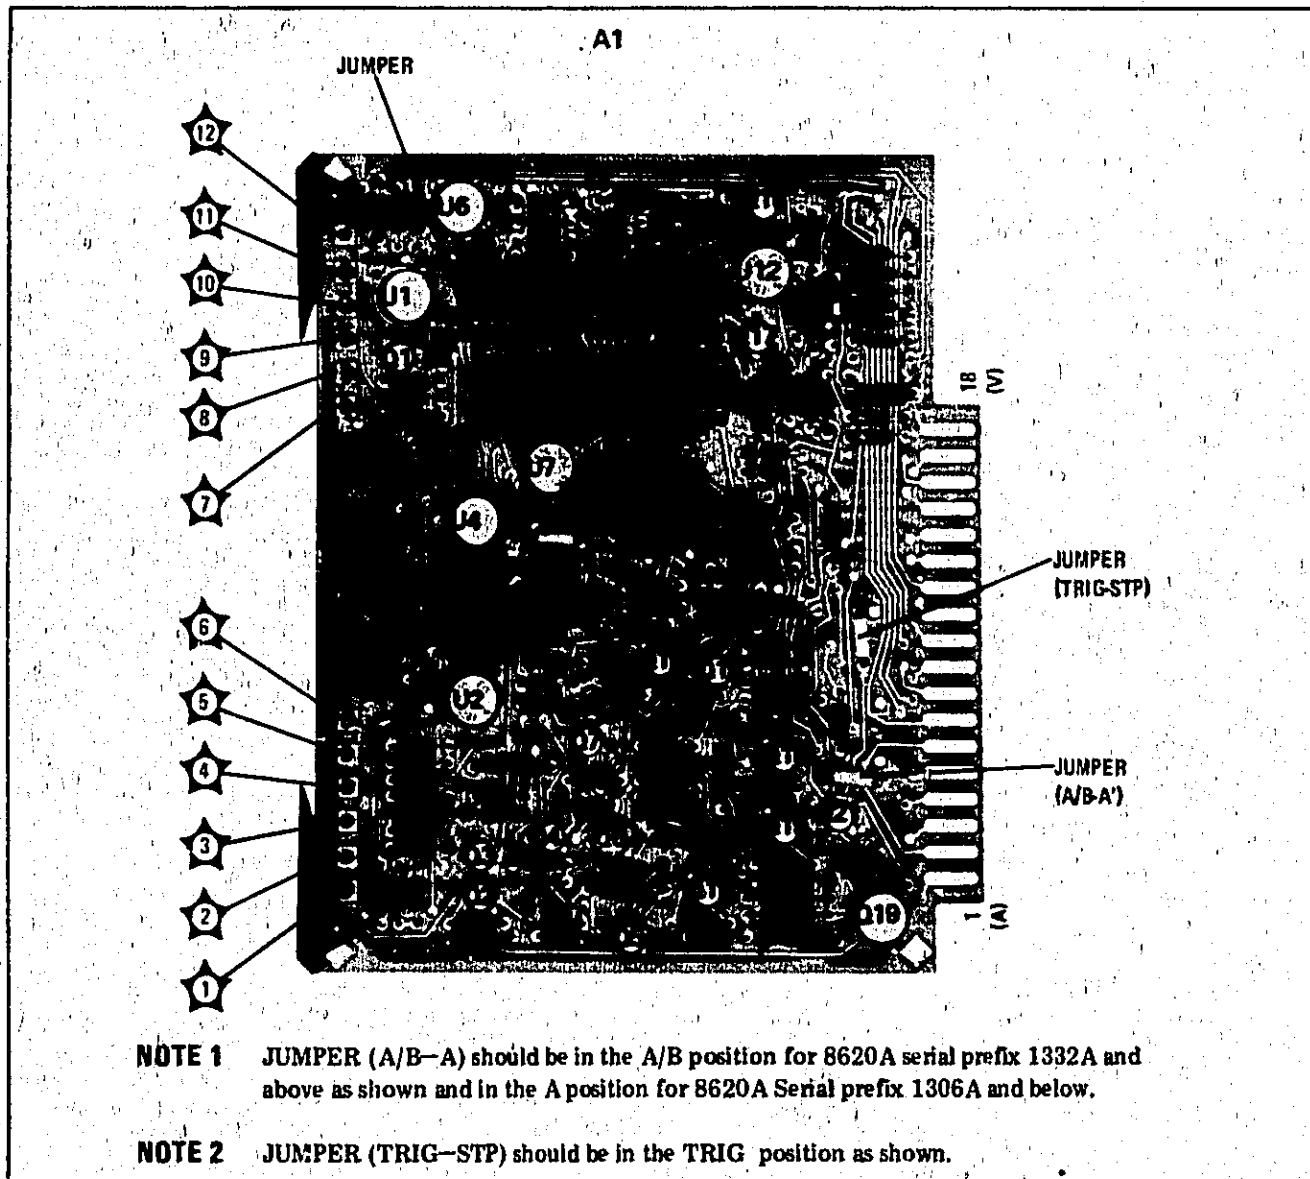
A1 Sweep Generator Assembly, Jumper Position
